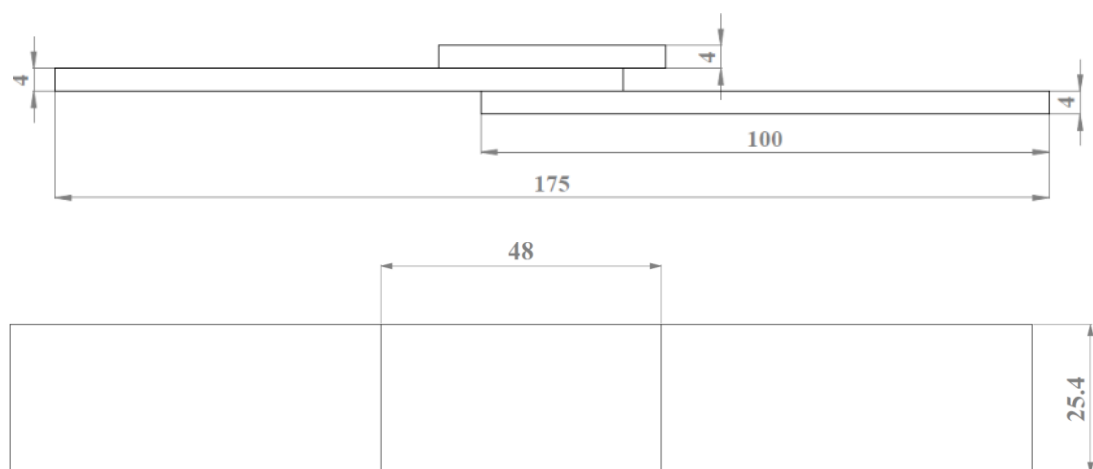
The dimensions (in mm) of the lap-shear tensile specimen for ABS-ABS, PC-PC, and ABS-PC joints.
